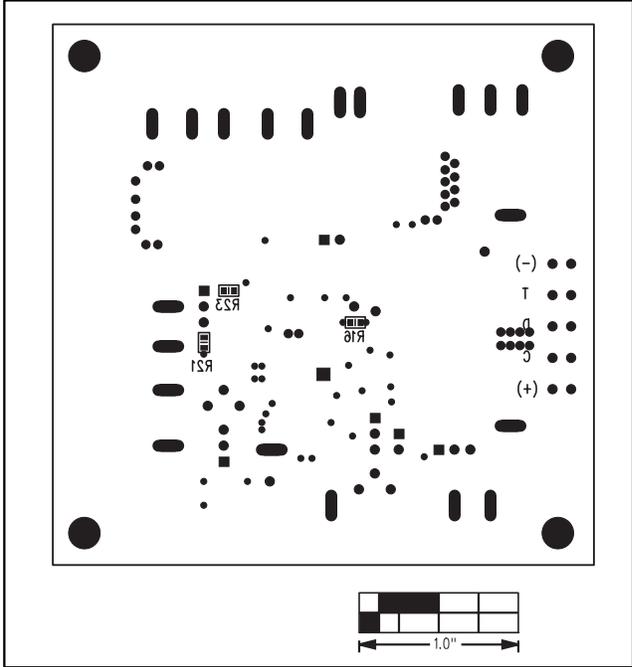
MAX1908 EV Kit PC Board Layout—Solder Side
